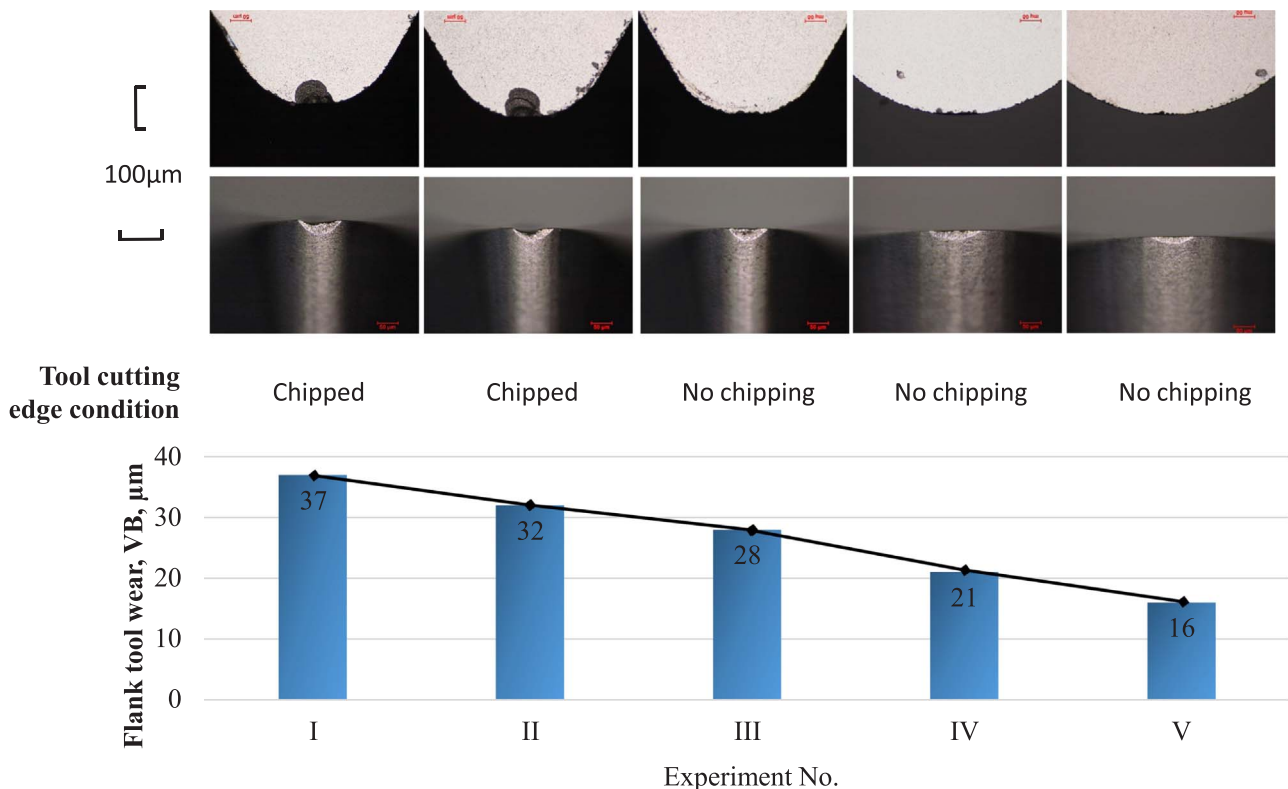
PCD tool fracture and wear conditions for the 5 face turning tests (31 m cutting distance) with different cutting conditions.
